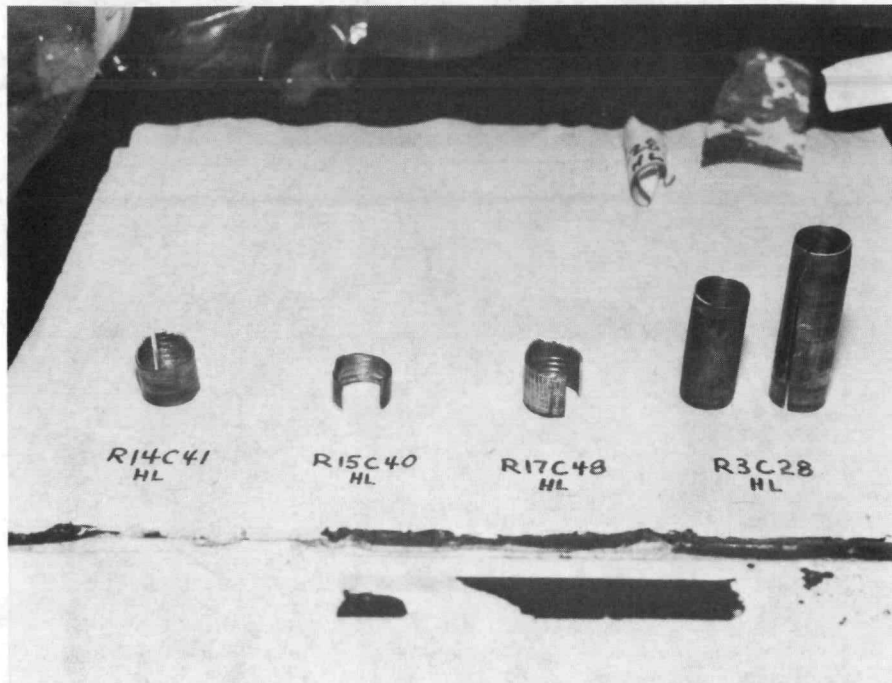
Examples of Failed Tube Ends. These sections failed during pulling of previously plugged tubes.
